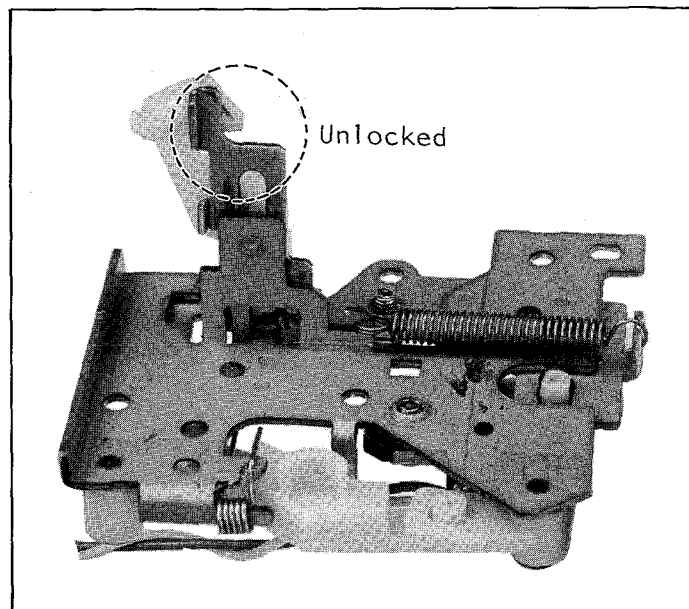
Adjustment of Cam Gear and Mode Select Switch - (7)
